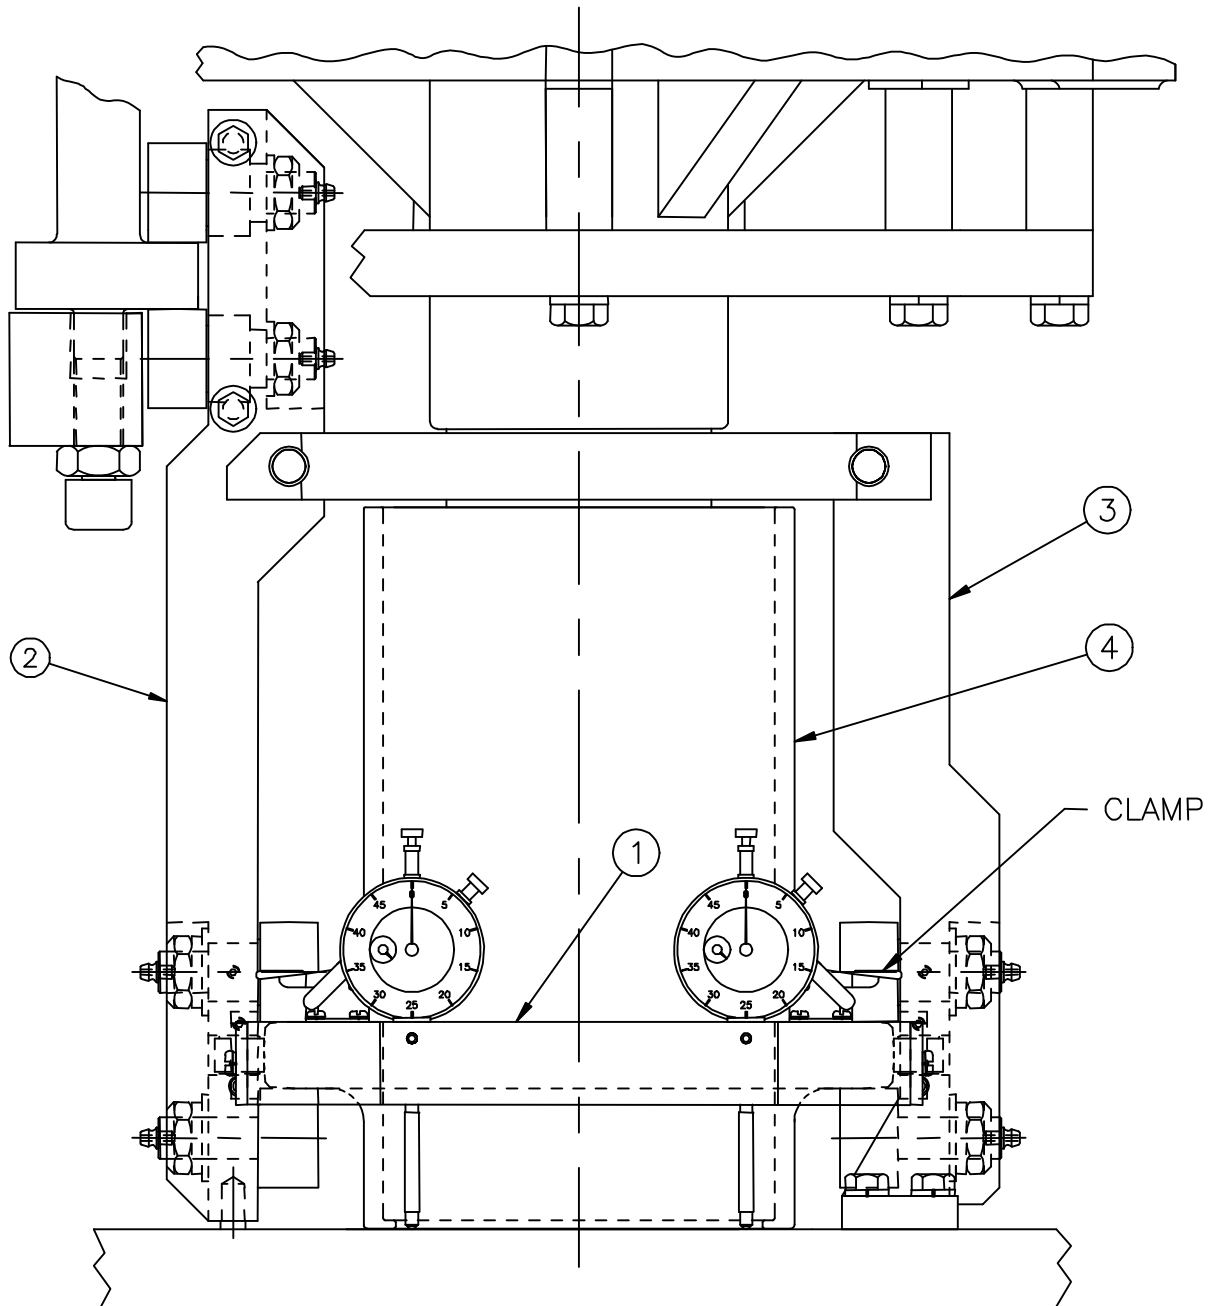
CUTAWAY VIEW OF ANGLE VERIFICATION JIG ATTACHED TO MOLD
